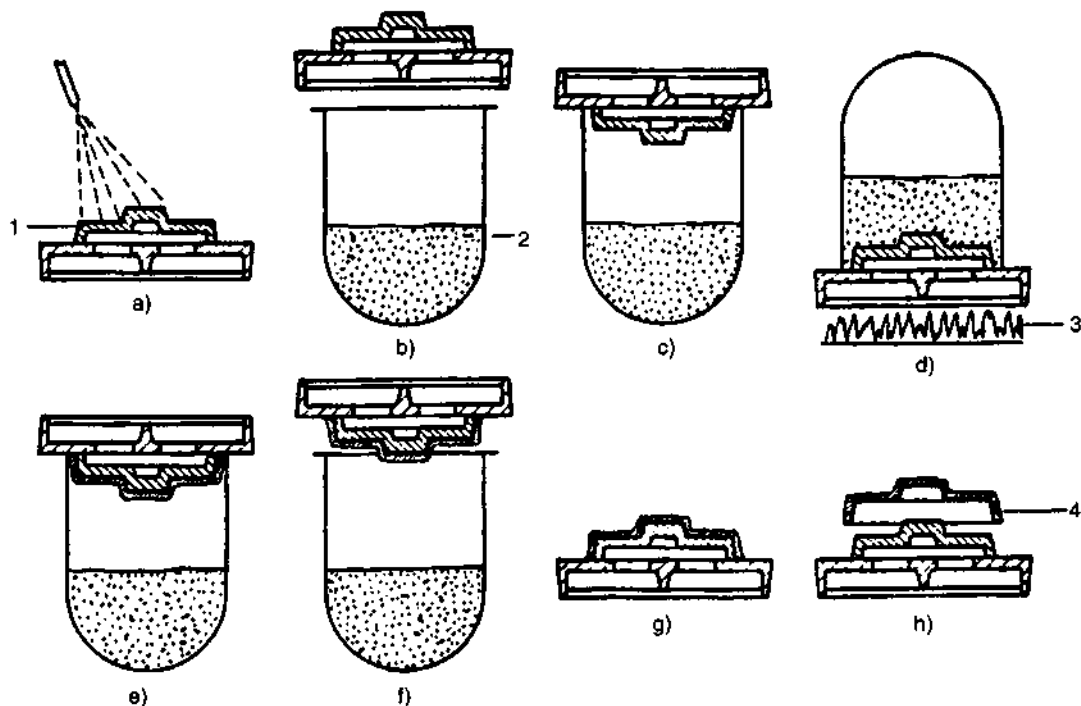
B3a The shell molding process. a) A silicon parting agent is sprayed on the preheated pattern. b) The preheated pattern is then brought to a dump box that contains a sand-resin mixture. c) The pattern is inverted and clamped to the top of a dump box. d) The dump box is inverted, sand falls against the pattern and is further heated for a short period. The resin in the sand mixture next to the hot pattern starts to set, causing sand particles to adhere together. e) The dump box is turned upright and the sand not in contact with the hot pattern or near to it, being unaffected, falls away. f) The pattern and the sand-resin shell are removed from the dump box. g) The pattern and shell are baked to fully cure the resin. h) The pattern is withdrawn from the shell. Two shells are fastened together, placed in a flask and supported with back up sand or metal shot. Molten metal is poured into the cavity formed by the two shells. Identified items: 1 - pattern, 2 - sand-resin mixture, 3 - burner, 4 - shell mold half. (from Davidson, *Handbook of Precision Engineering*, Vol. 10, McGraw-Hill, New York)
